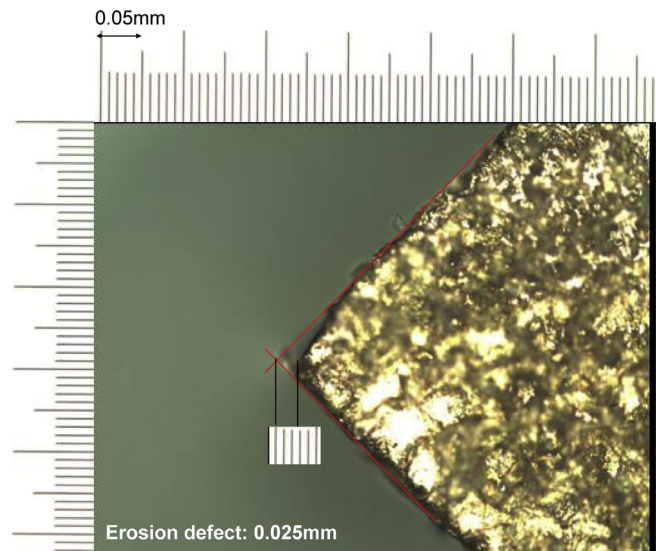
Loss of accuracy in corner cutting: a fillet radius is produced instead of a sharp corner due to wire-lag in a 90° corner (part material AISI D2 tool steel).
